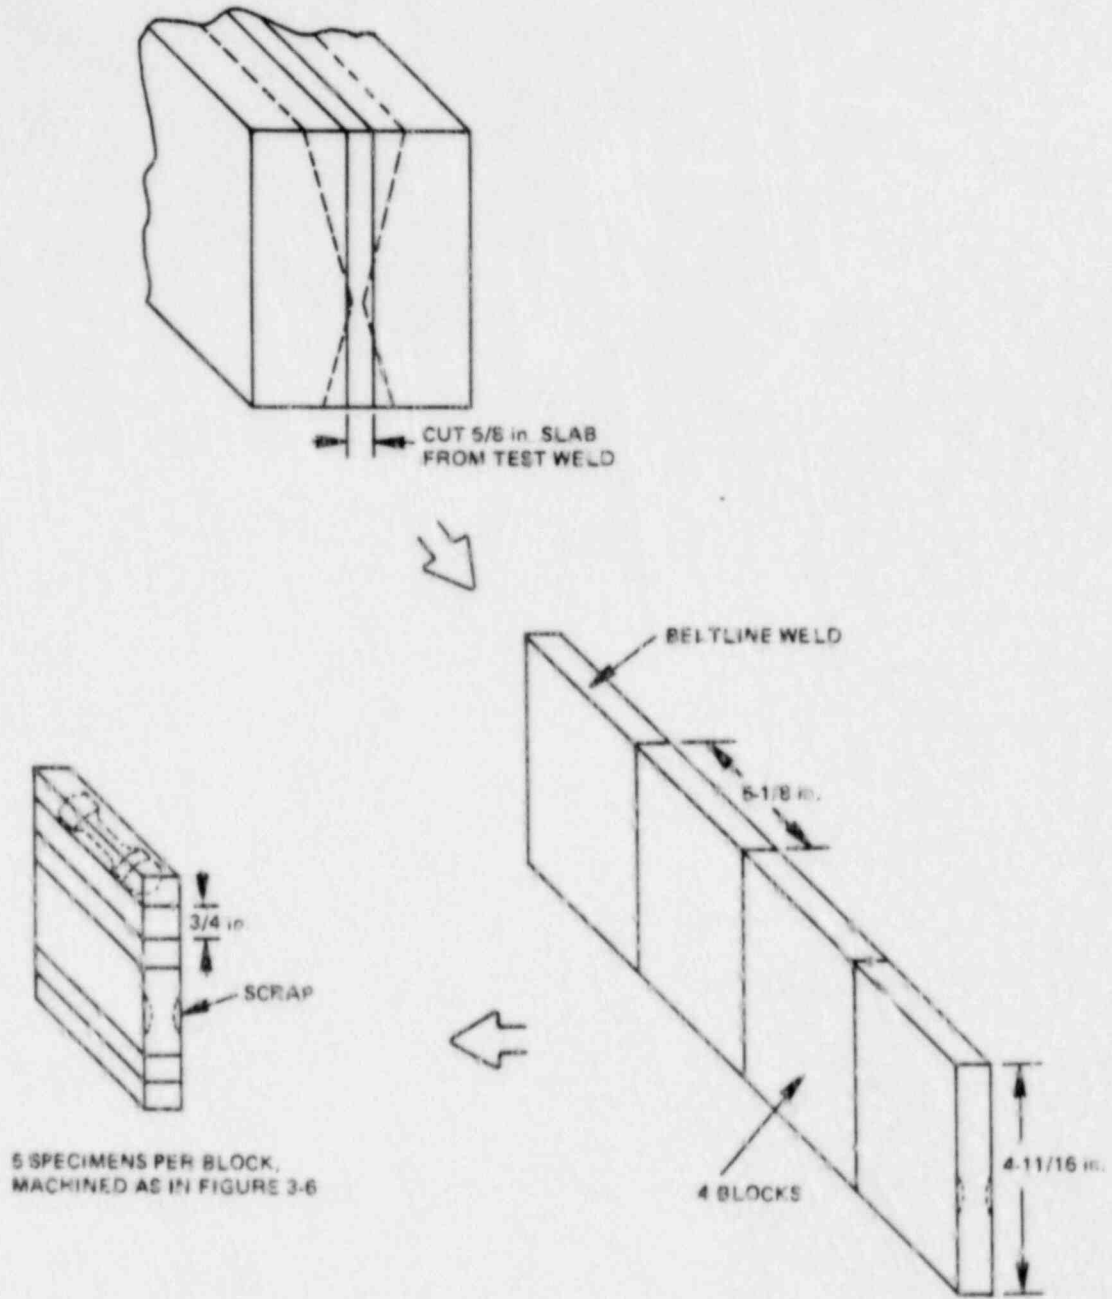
Fabrication Method for Weld Metal Tensile Specimens
